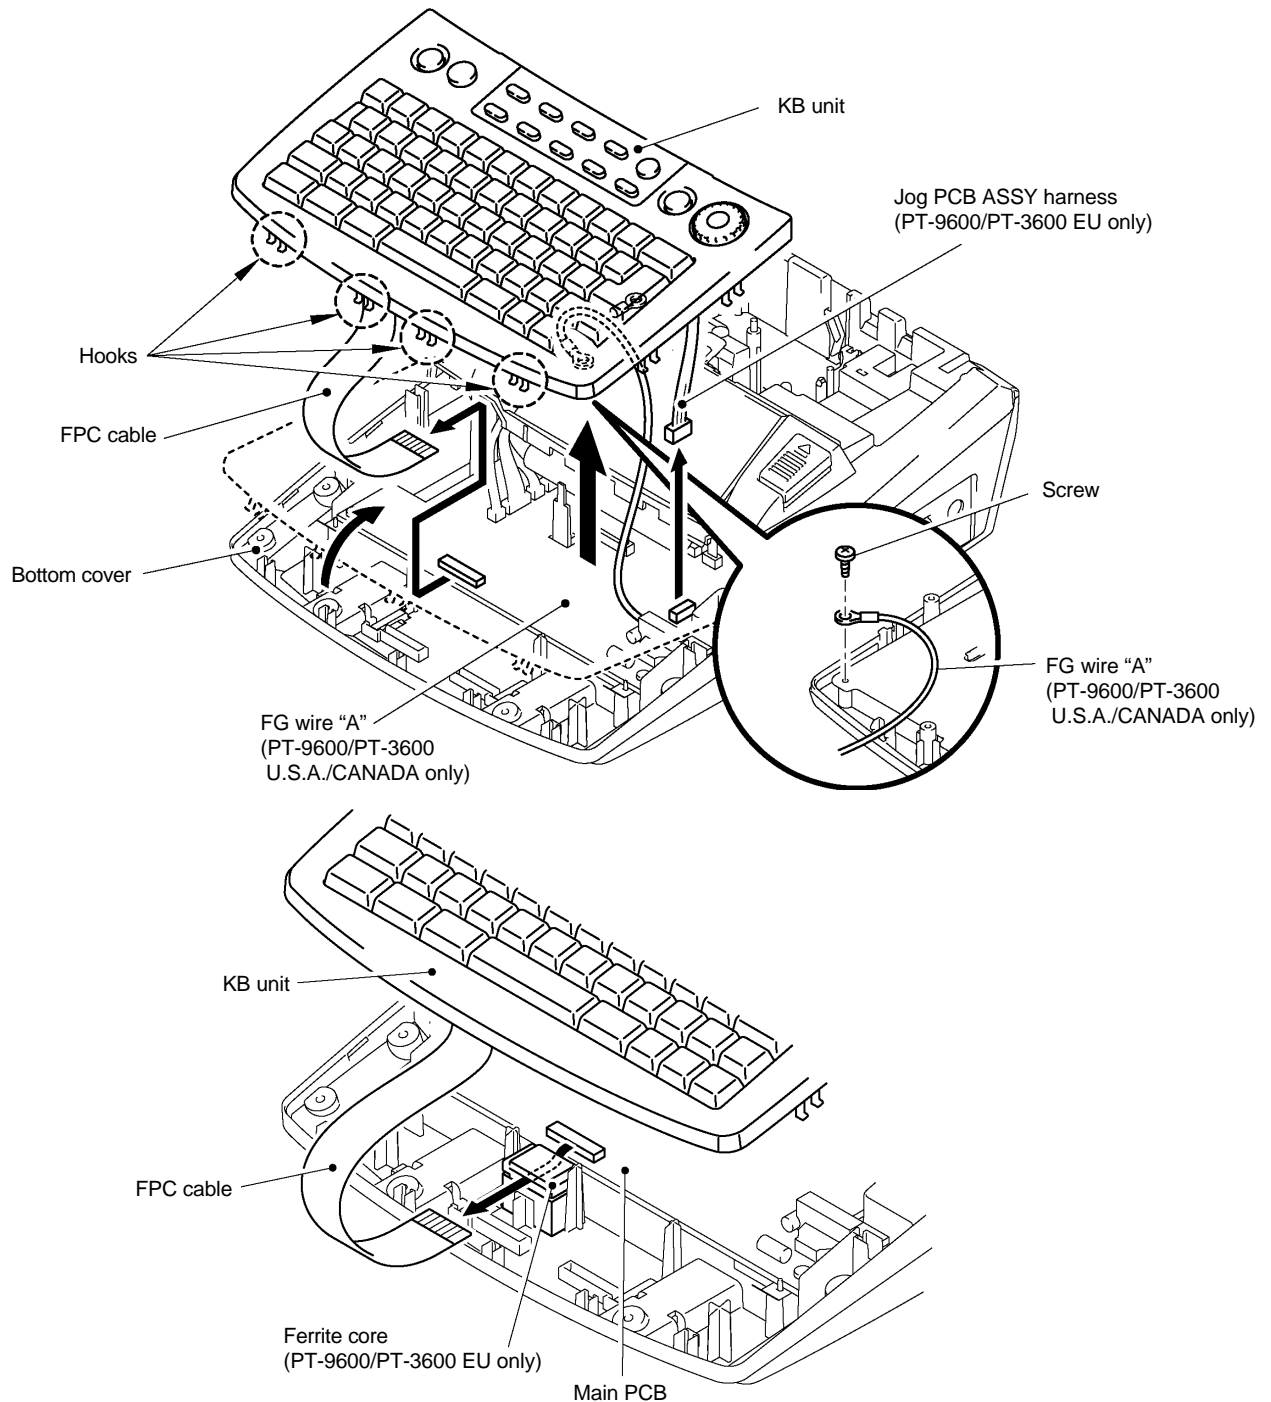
Removing the KB Unit/Rubber Key Unit
